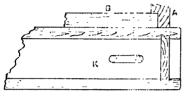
Part Longitudinal Section of Bottom Book of Workbox.
